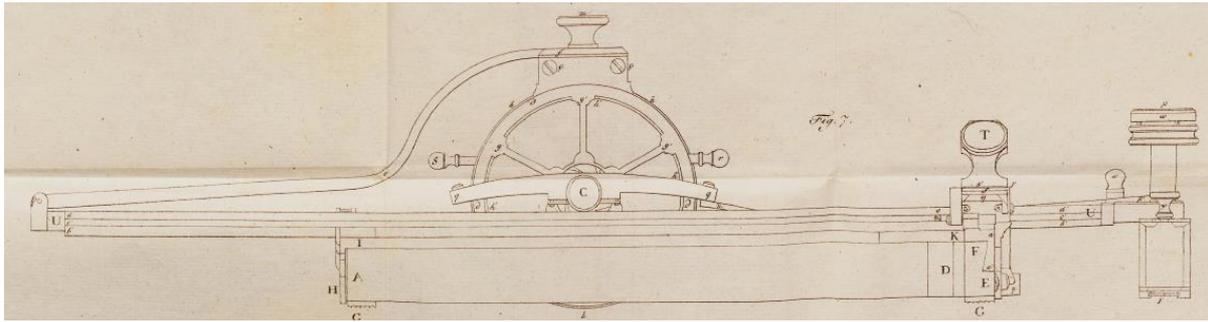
Zobel-Müller Planimeter, side view (Source: [MulZob1815]).
